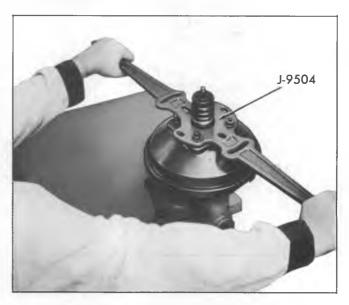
B-Separating Shells with Tools J-9504 and J-22805-(Passenger Car Shown as Typical)
